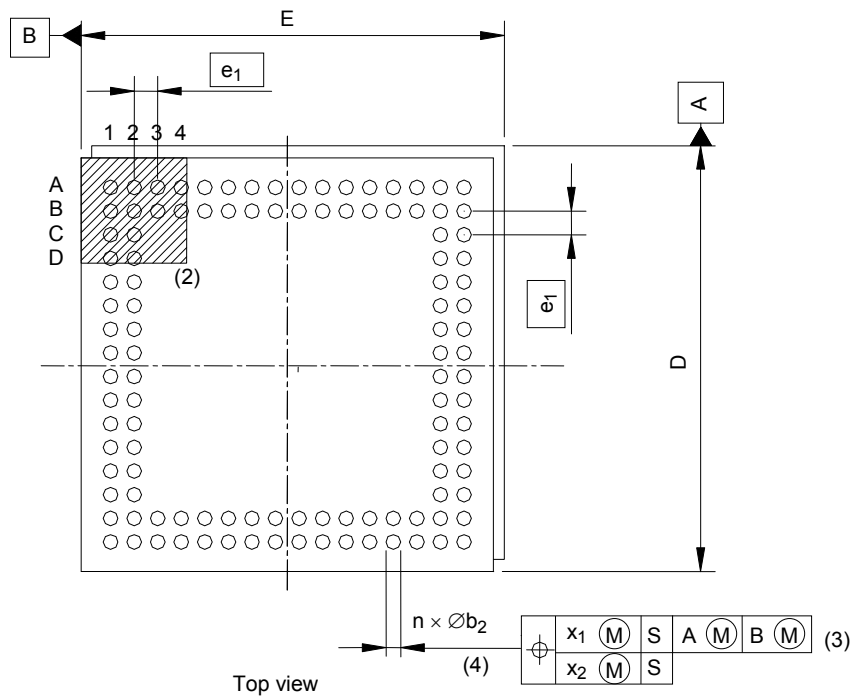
Stacked package outline, P-PFBGA (cavity-up BGA and cavity-up BGA)
